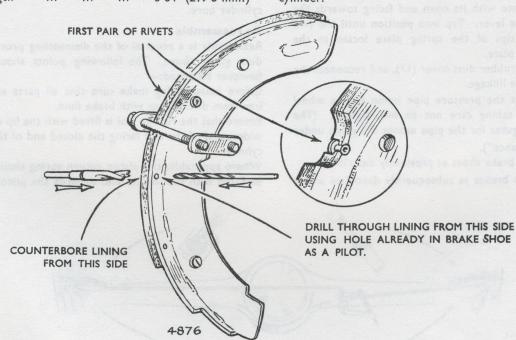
Method of drilling "off the roll" linings when these have to be used
